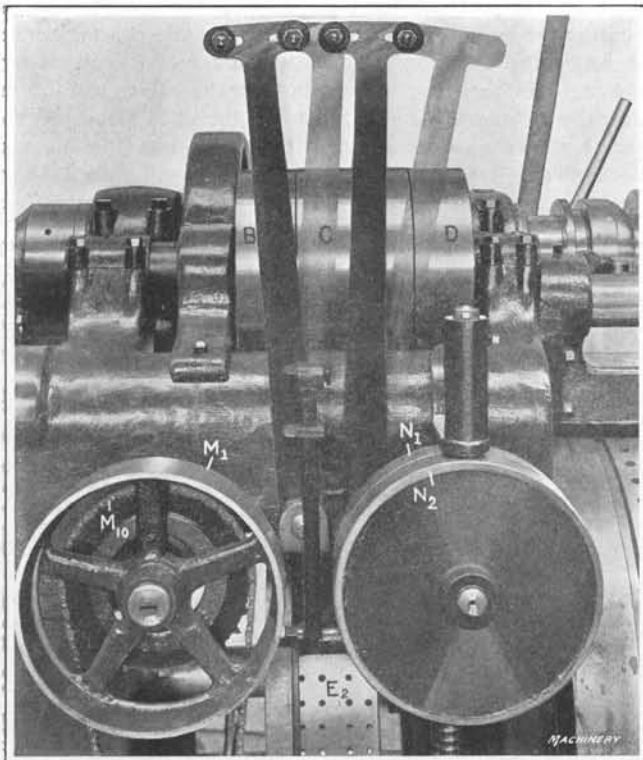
Rear View, showing Drive for Main Cam-shaft and Indexing Mechanism
